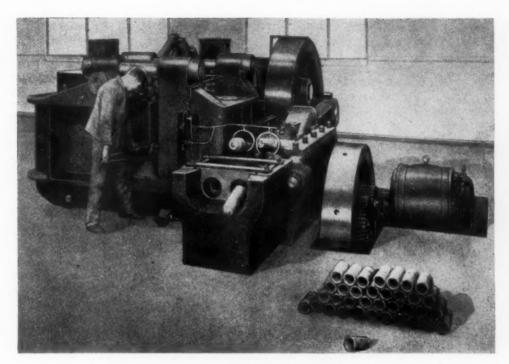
BALDWIN-OMES SHELL-FORMING MILL
